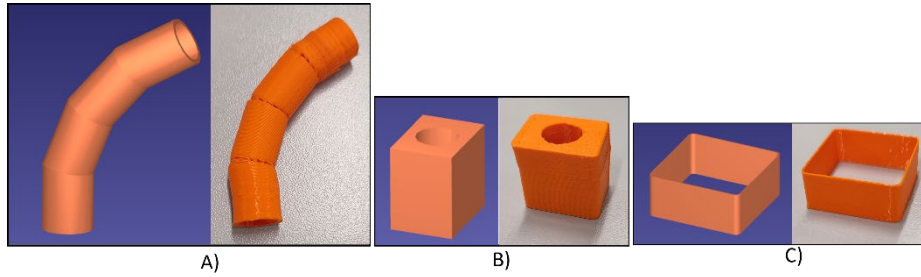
A) Tube 3D model (left) and Cobot printed Tube (right); B) Holed Cube 3D model (left) Cobot printed cube (right); C) Squared thin wall 3D (left) and Cobot printed workpiece.
